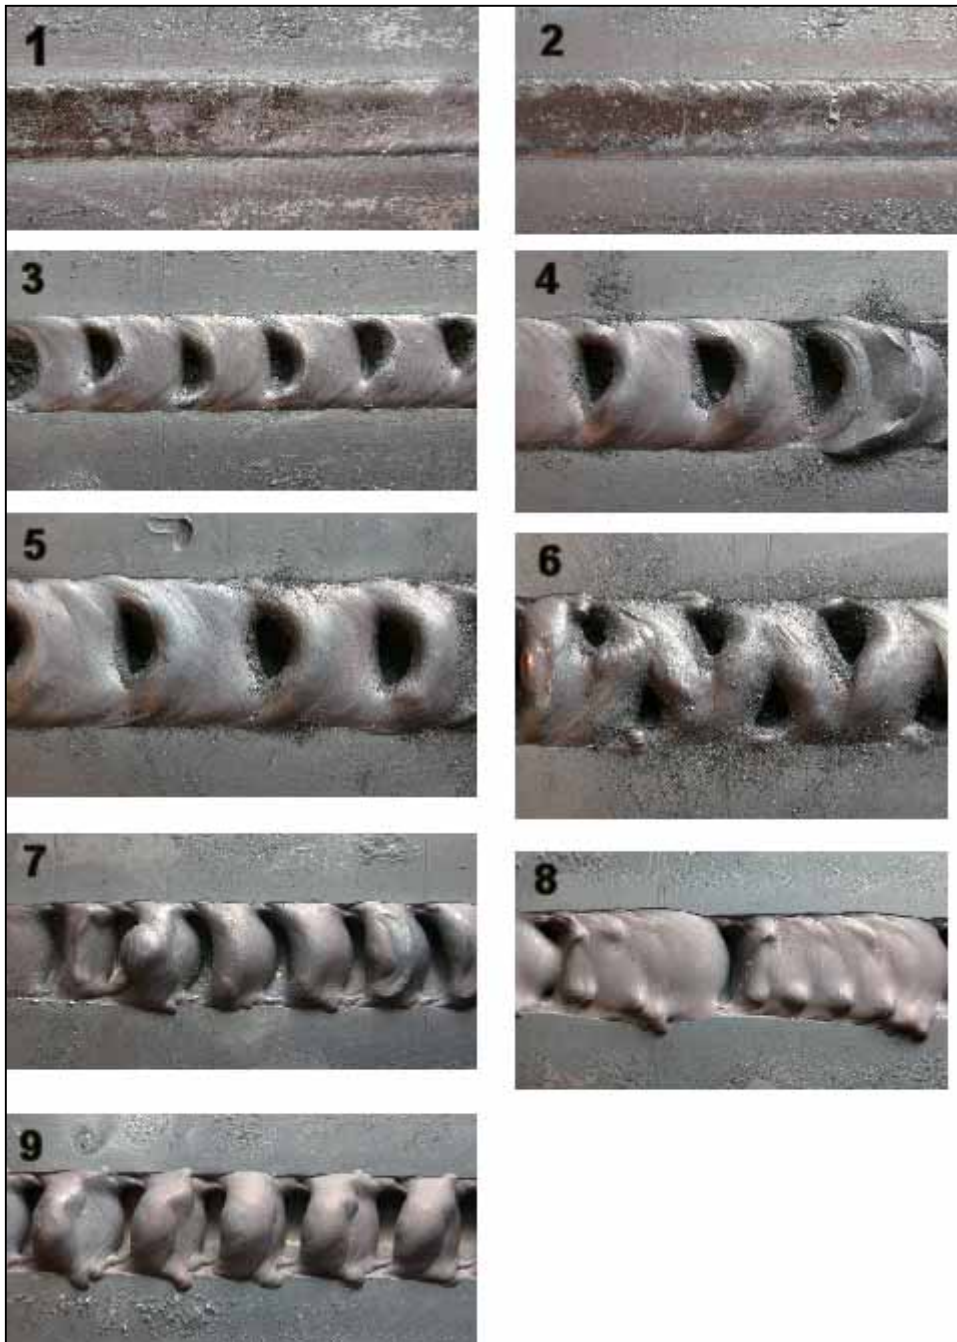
The welding trials for 25 mm copper workpiece. The numbers in Figure refer to Table 4.
